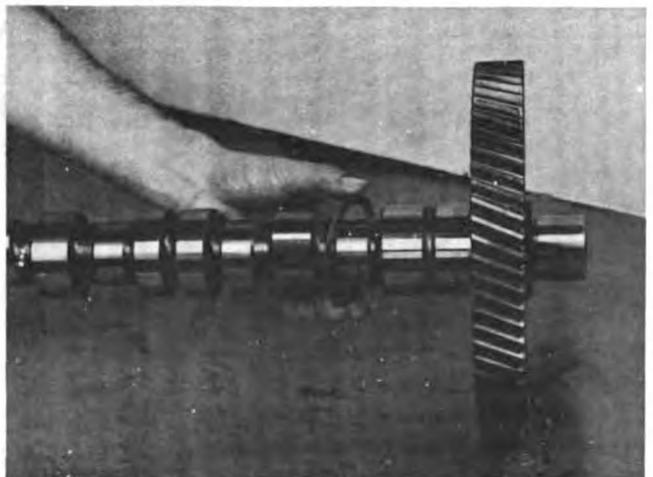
(N114253). Install The Thrust Ring Onto The Camshaft.
